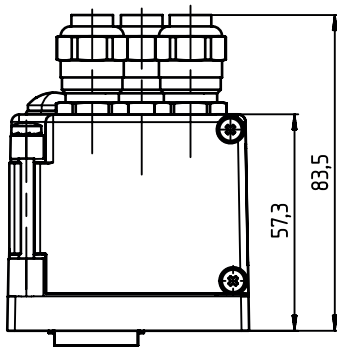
Dimensioned drawing BPS with MK 3007 connection hood
